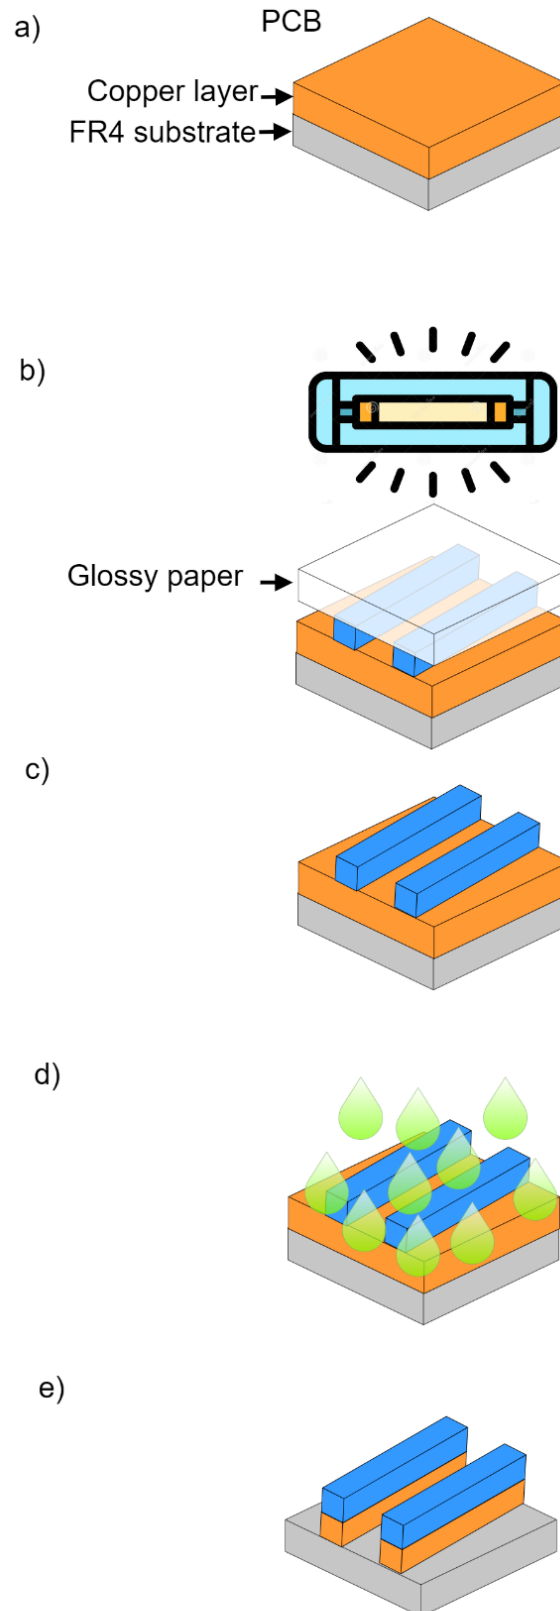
Fabricating the PCB using the chemical method. A) PCB, b) Applying UV light over the glossy paper where the design is printed, c) Transferred design over the copper layer, d) Applying ferric chloride to remove unnecessary copper(etching), e) Final PCB with tracks on it
